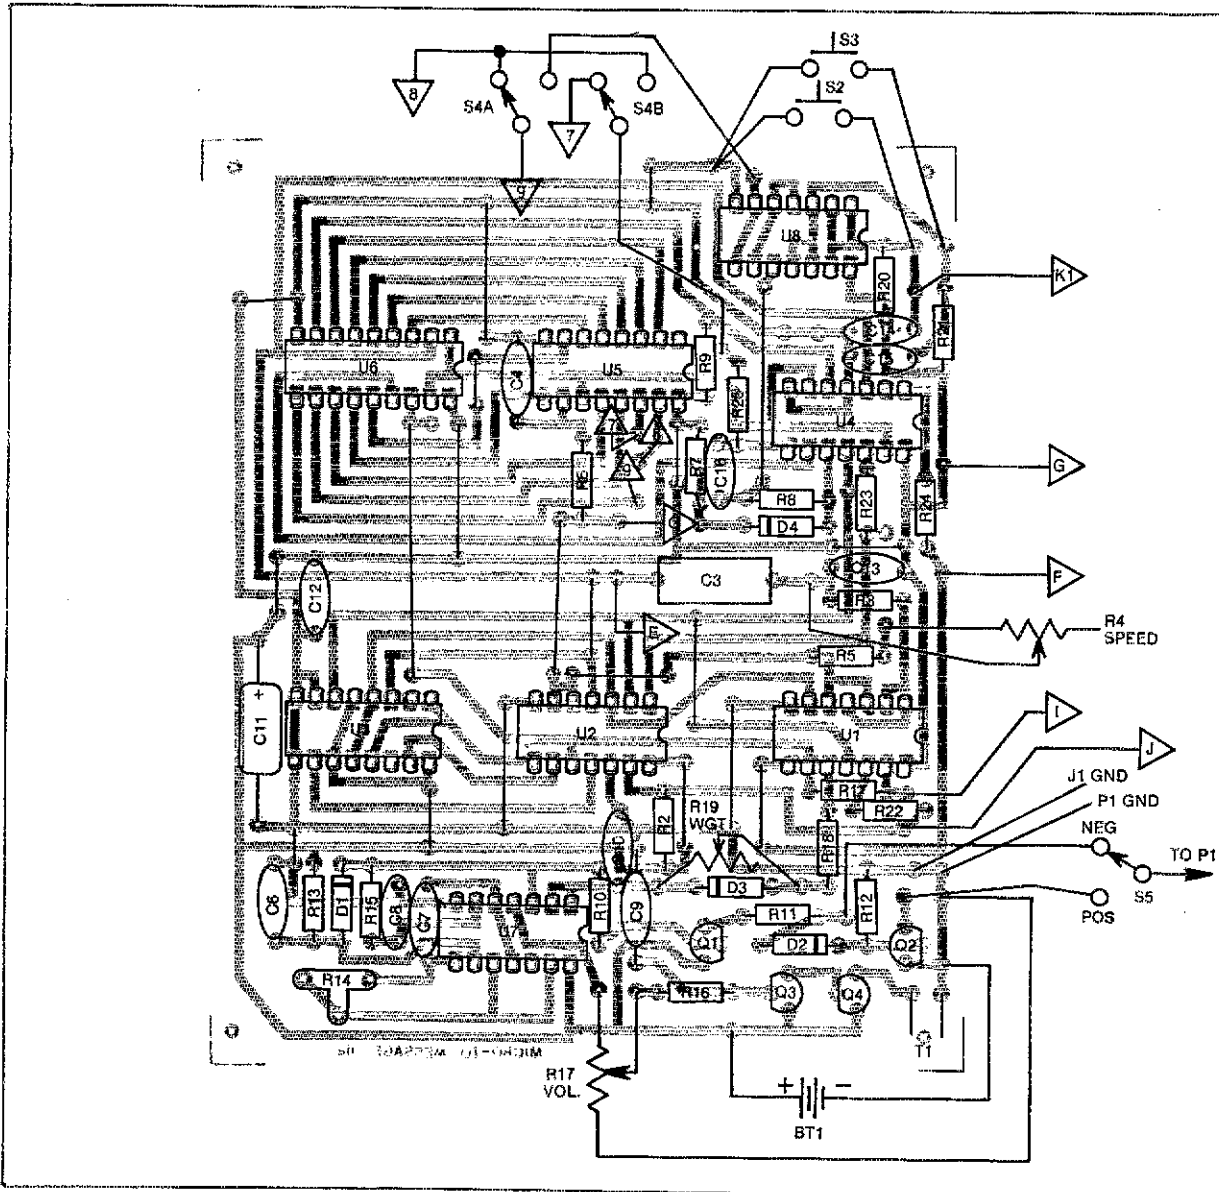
Parts-placement guide for the revised master circuit board as viewed from the component side. The shaded area represents an X-ray view of the copper pattern. The etching pattern appears in the "Hints and Kinks" section of this issue. Wire jumpers are indicated by unmarked straight lines.
